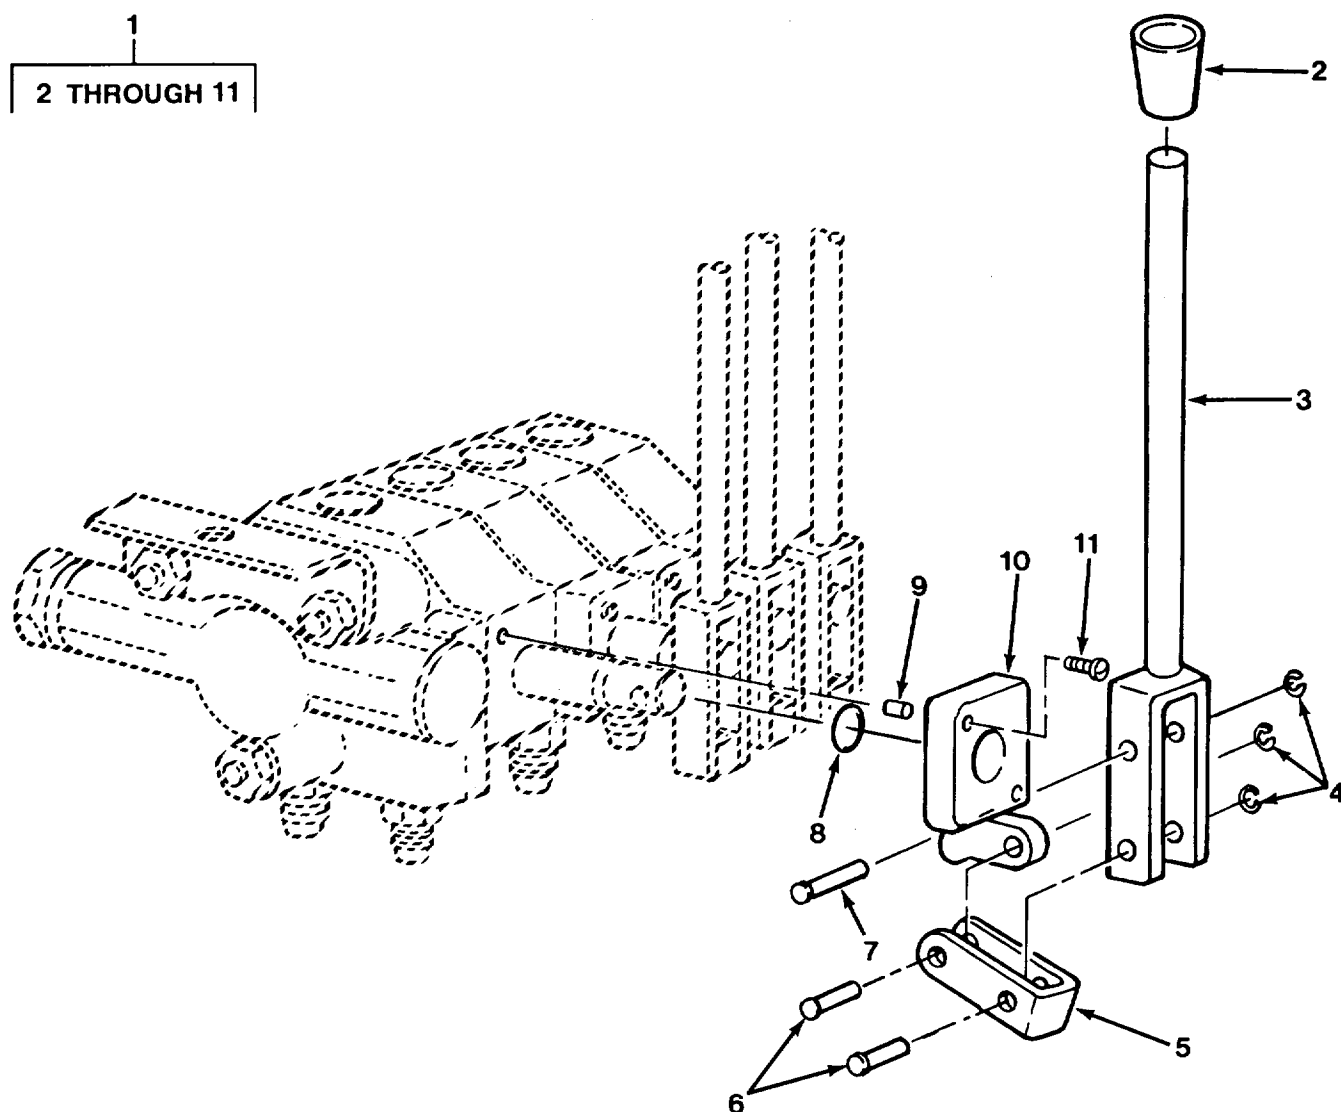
CONTROL LEVER VALVE ASSEMBLY
